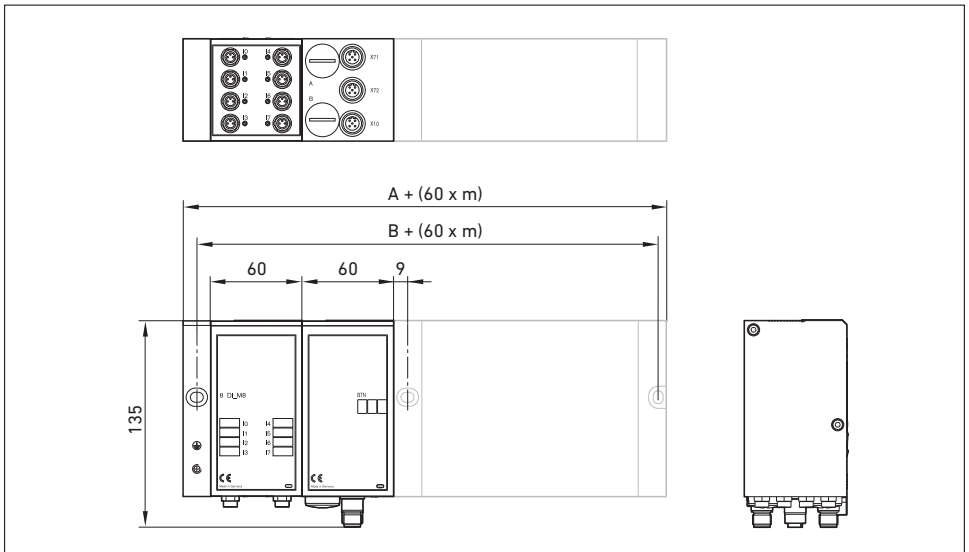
Dimensioned drawing of the valve system (bus coupler and valves)
